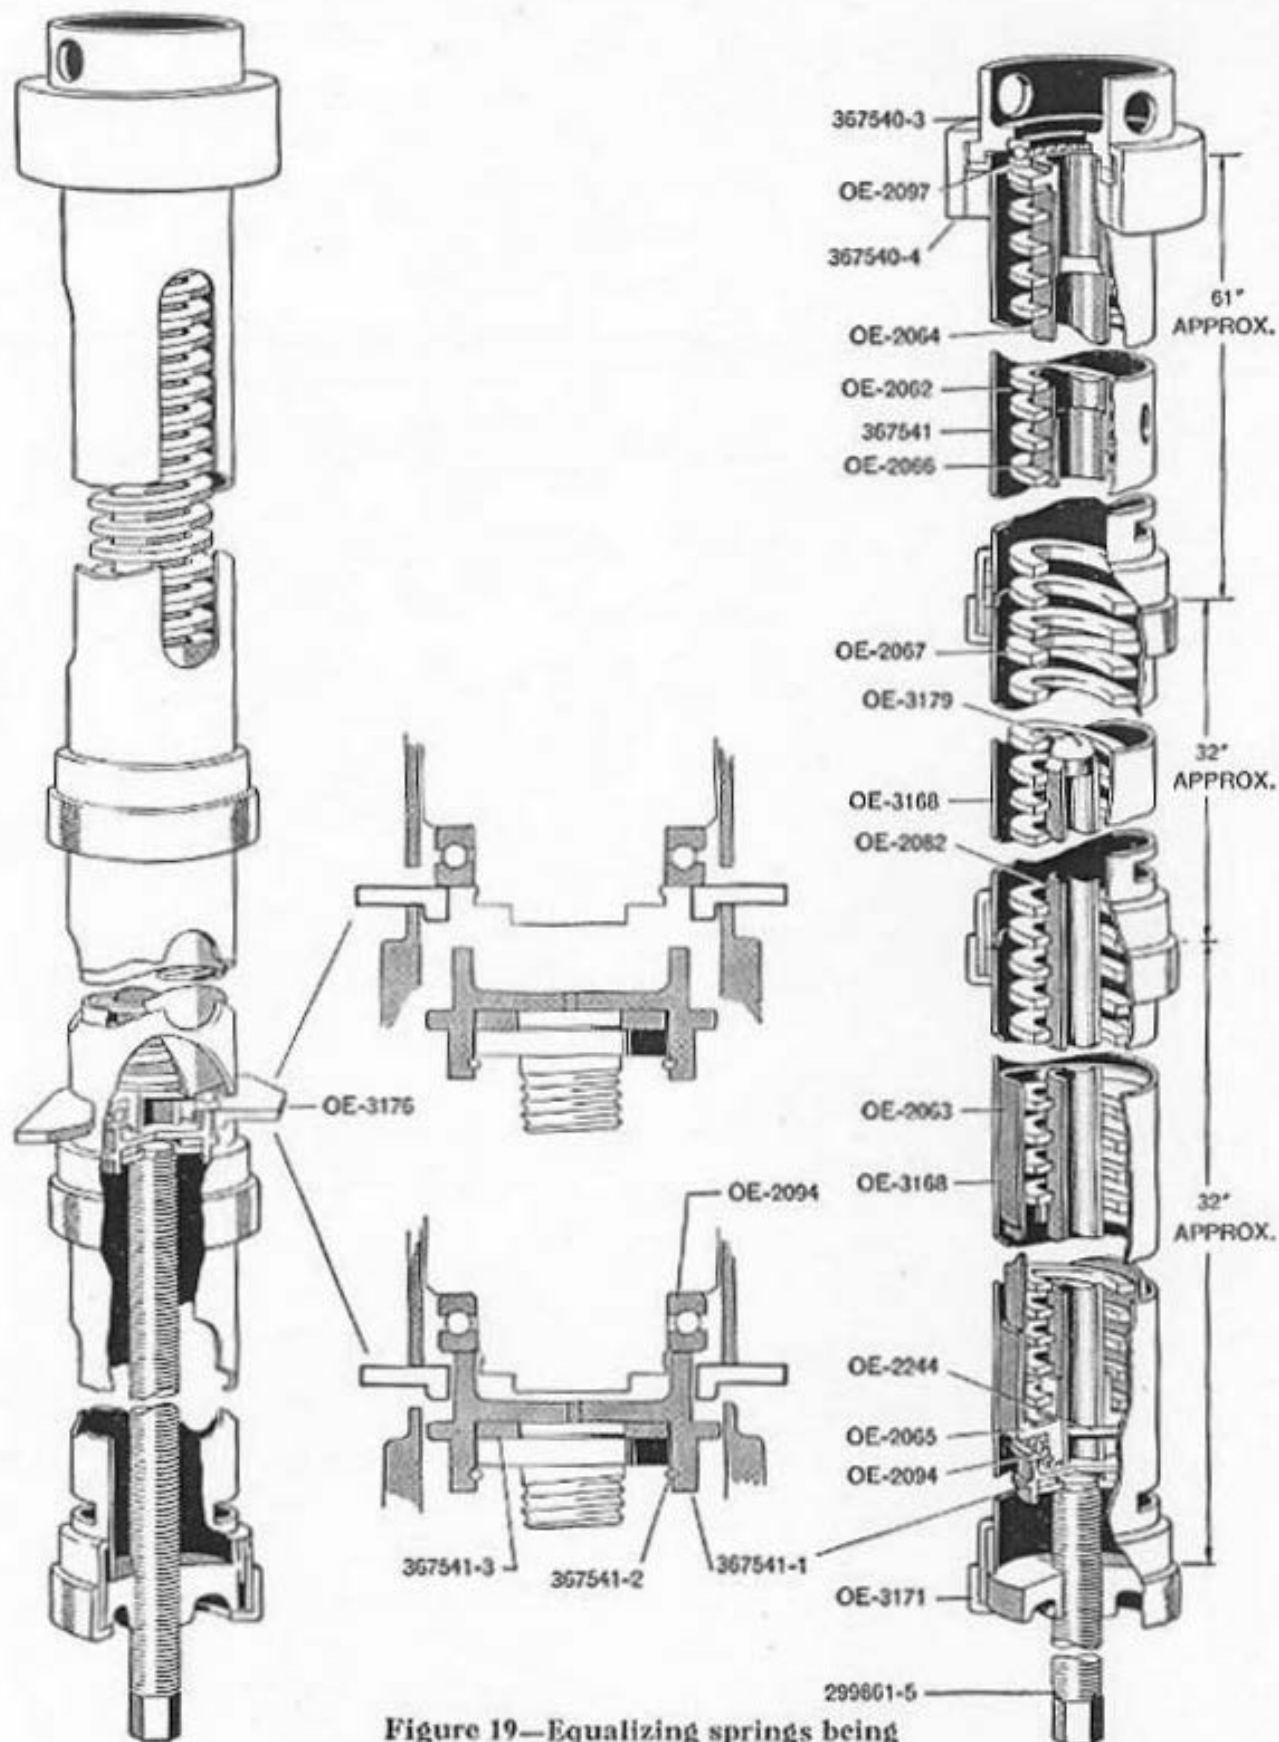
Equalizing springs being held by stop plate (OE-3176)
